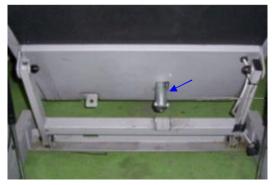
Check: Make sure incline motor securing bolt and nut not too tight to cause E6, E7 error code (Incline motor cannot change angle during inclining and declining.
